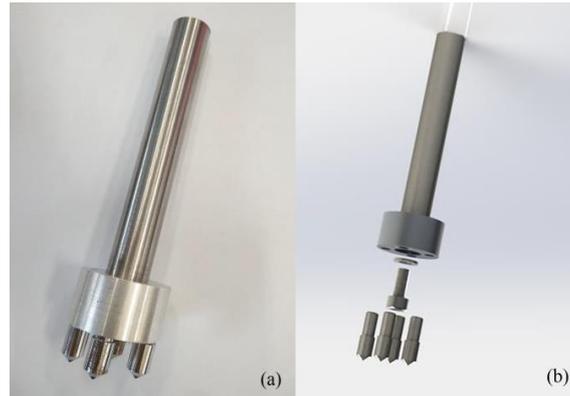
The diamond tool for single grain grinding test: a) the picture of the diamond tool, b) the component diagram of the diamond tool.
